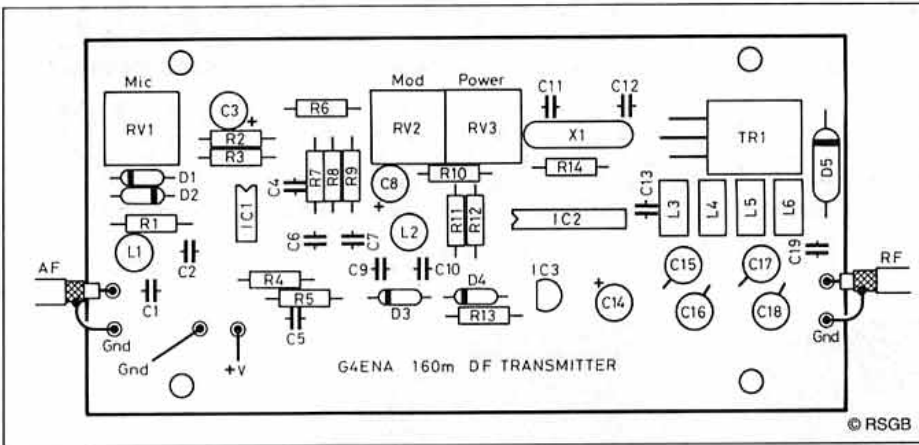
Component layout on the PCB. The transmitter could also be built on a prototype board.
